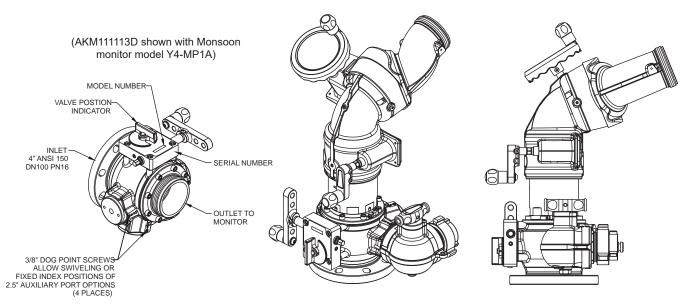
VUM WITH MANUAL CRANK CONTROL ( WORM DRIVE GEARBOX )
